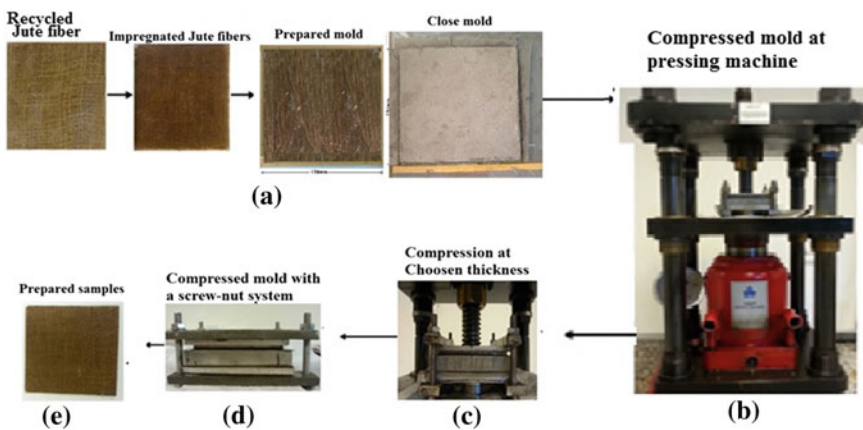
a Processing jute fiber and molding. b Compressed mold at a pressing machine. c Compression to a chosen thickness. d Compressed mold using a screw–nut system. e Prepared samples
